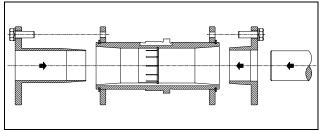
Short Shaft Bushing and Output Hub Assembly
